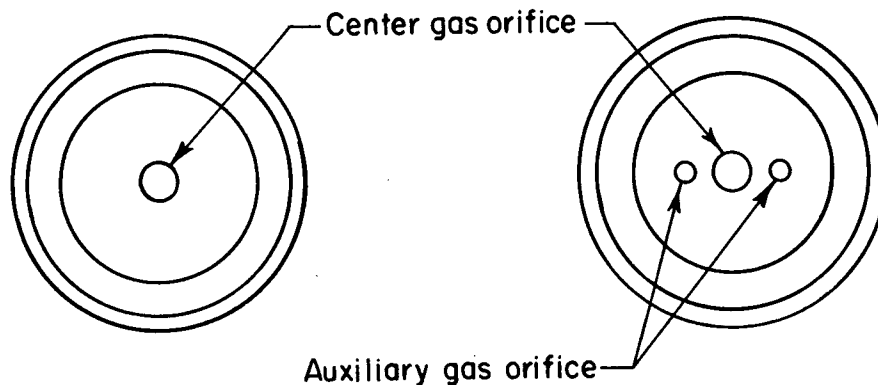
TYPICAL SINGLE AND MULTI-ORIFICE PLASMA-ARC WELDING NOZZLES
